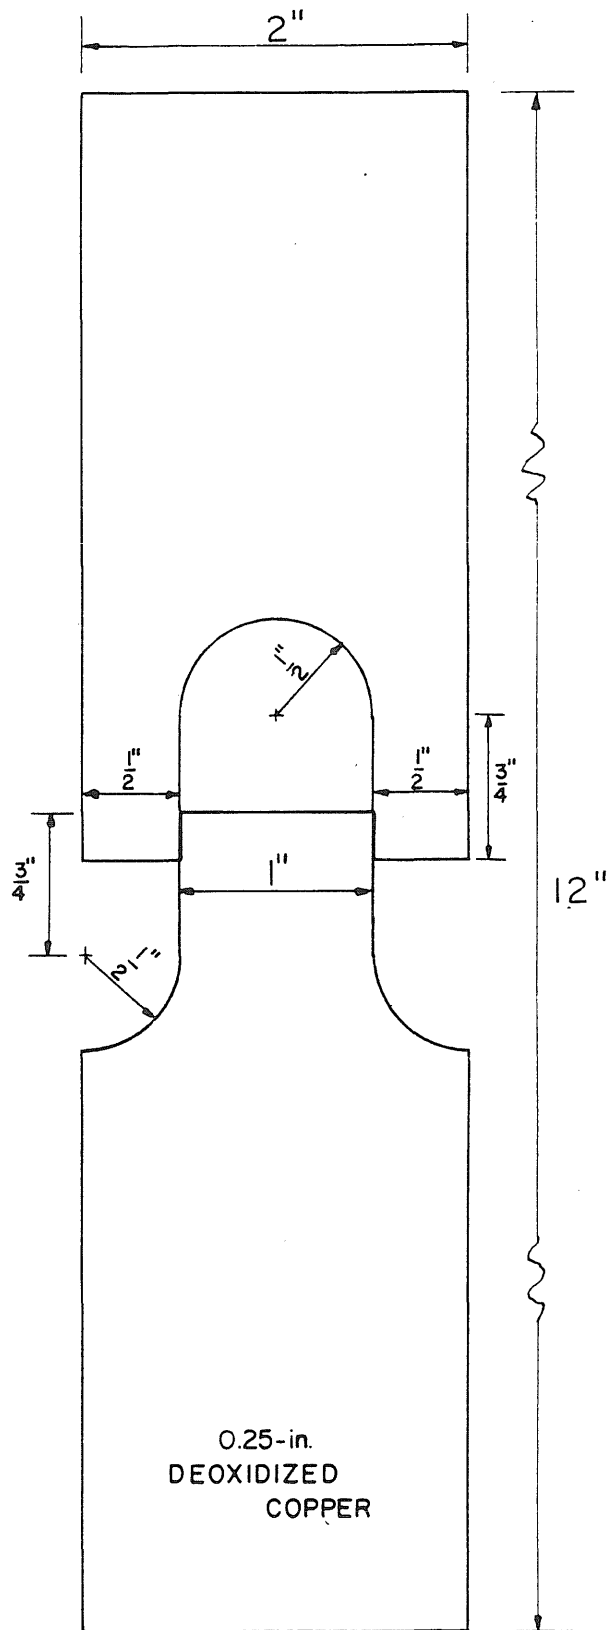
DETAILS OF GROUP II PRELIMINARY SPECIMENS
